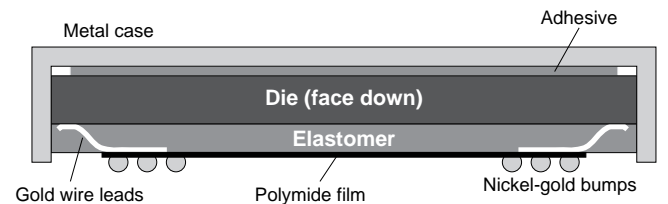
Tessera's micro-BGA is barely larger than the die itself. The elastomer provides a cushion between the die and the PC board, while the gold bond wires flex enough to handle different thermal expansion rates between the die and the board.
